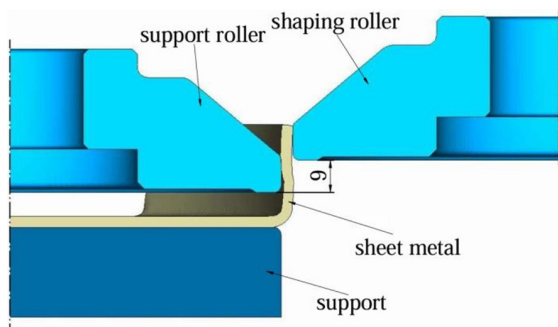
The method of setting the tools when the support roller starts moving in the vertical axis
